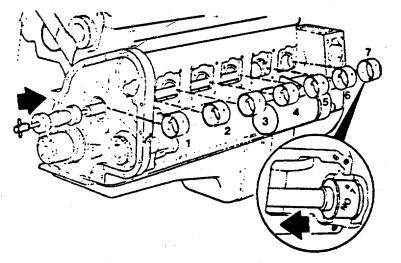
Camshaft Bushing/Bearing Removal Sequence.
